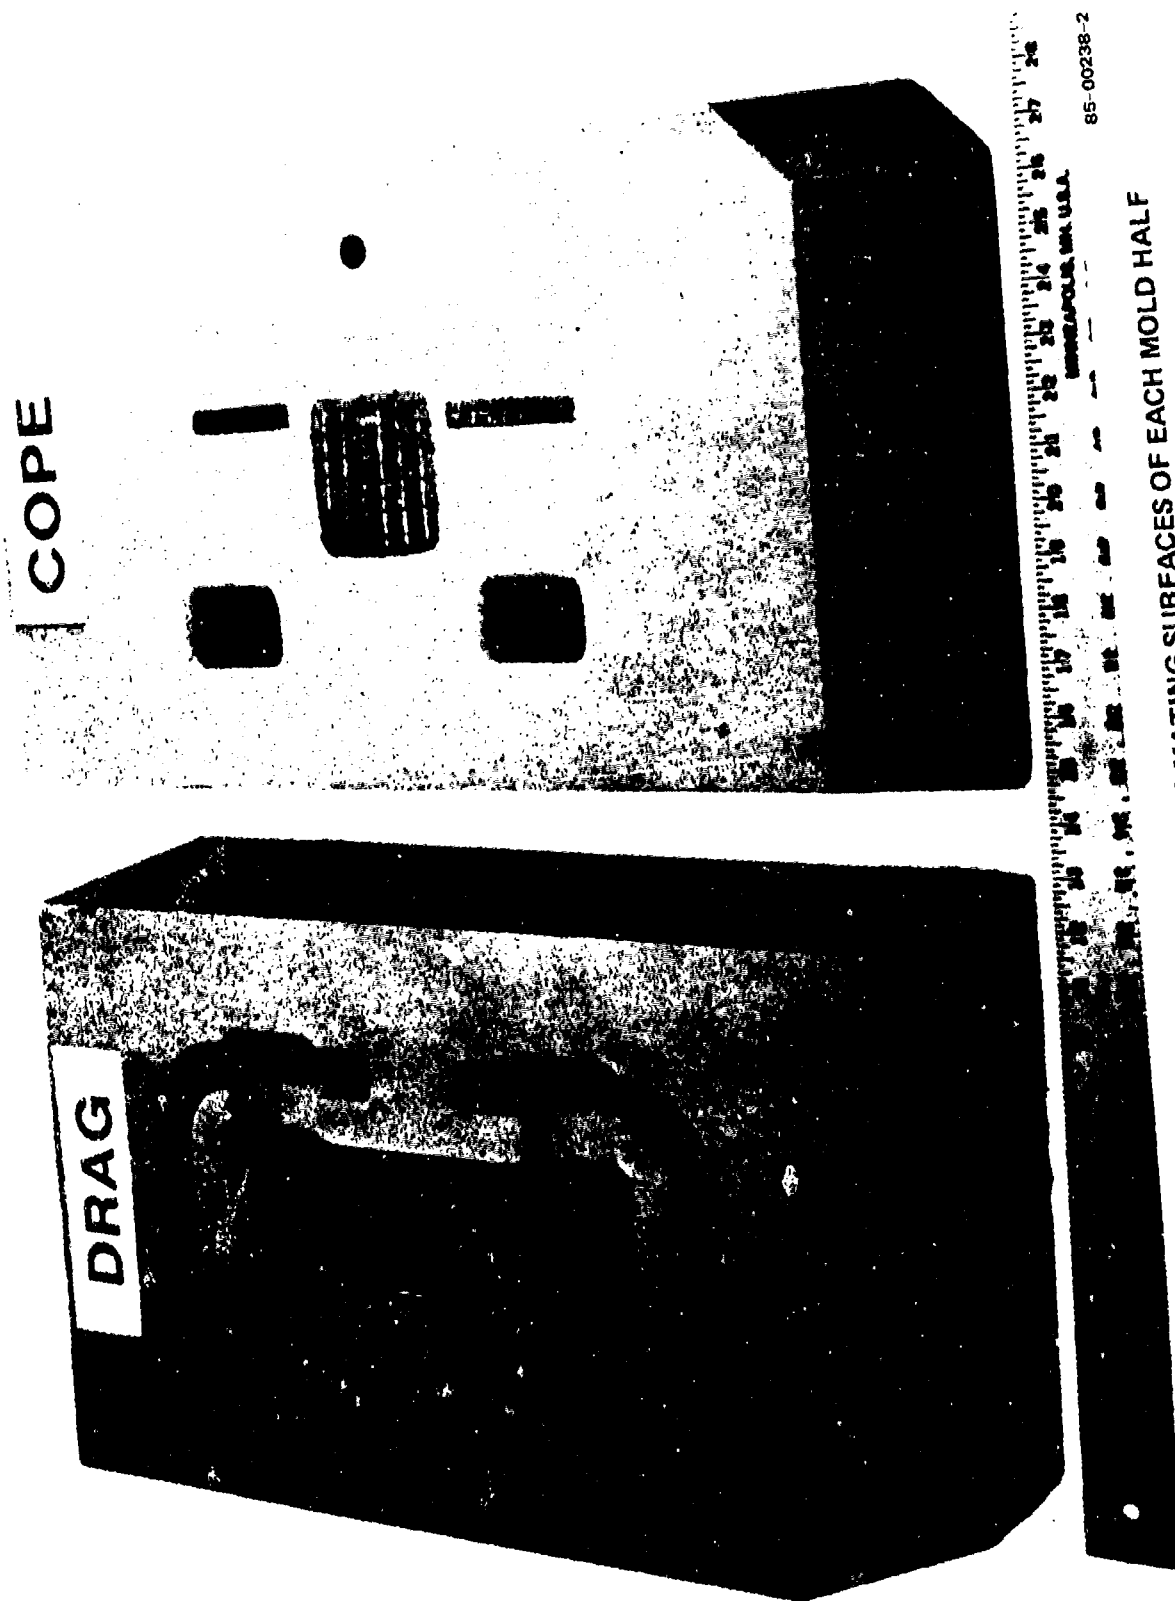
COPE AND DRAG MOLDS SHOWING MATING SURFACES OF EACH MOLD HALF
